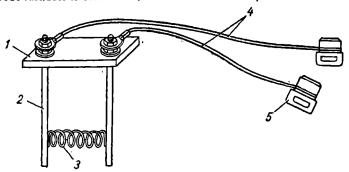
Coil for melting of salt in salt baths: 1-asbestos-cement; 2-pin; 3-coil from Ø 4 mm, 1-1.6 m wire; 4-MPF wire; 5-contact blade
